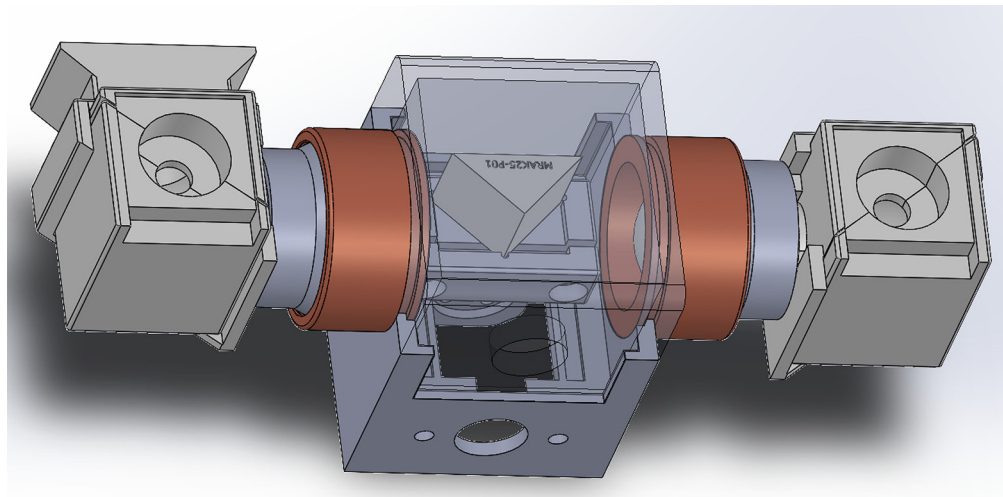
3D drawing of assembled visual colorimeter. The mirror enclosure body is made transparent in this drawing to show the right-angle mirror within.
